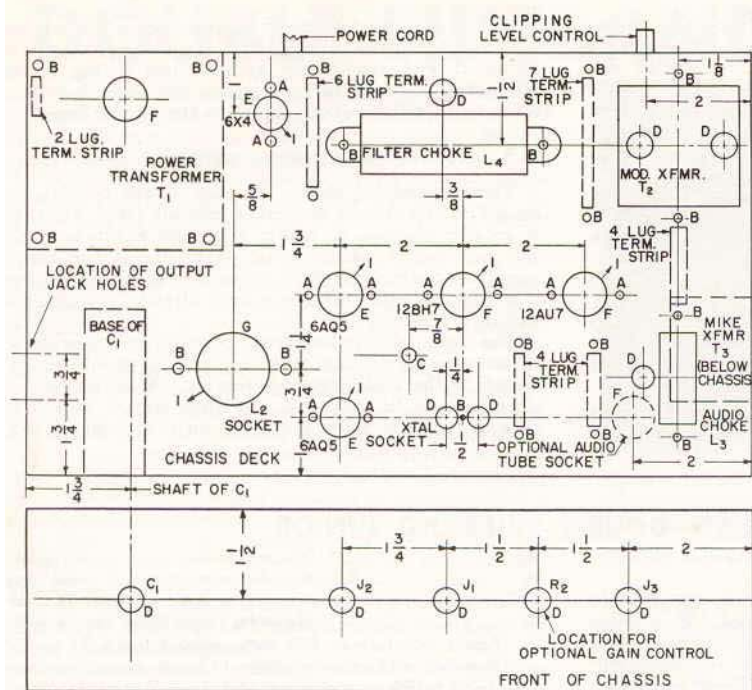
Chassis deck and front panel drilling diagram for the double sideband transmitter. Dimensions are shown from the edges of a 7 x 12 x 3-inch deep chassis. Tube sockets should be mounted with pin 1 in the position indicated at each socket hole. The socket for the optional audio preamplifier tube (V_6) and gain control (R_3) are located as shown.
